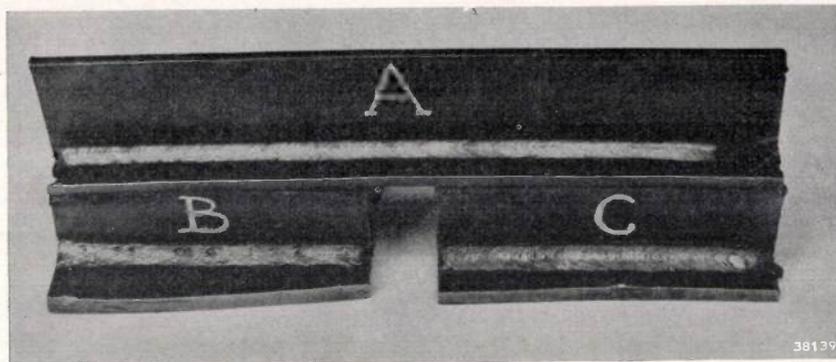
Fillet weld in free-cutting steel (0.23 per cent sulphur, 0.08 per cent phosphorus). The right-hand half is welded with an ordinary good quality welding rod (quite porous weld), the left-hand half with the Philips rod 55 (tight weld).
